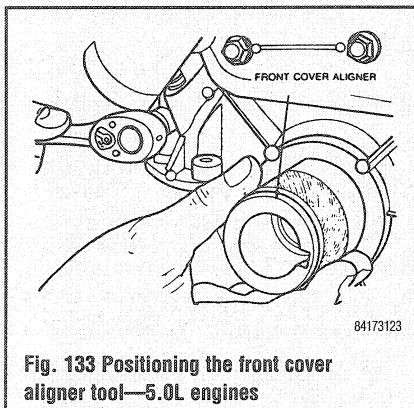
Positioning the front cover aligner tool—5.0L engines
